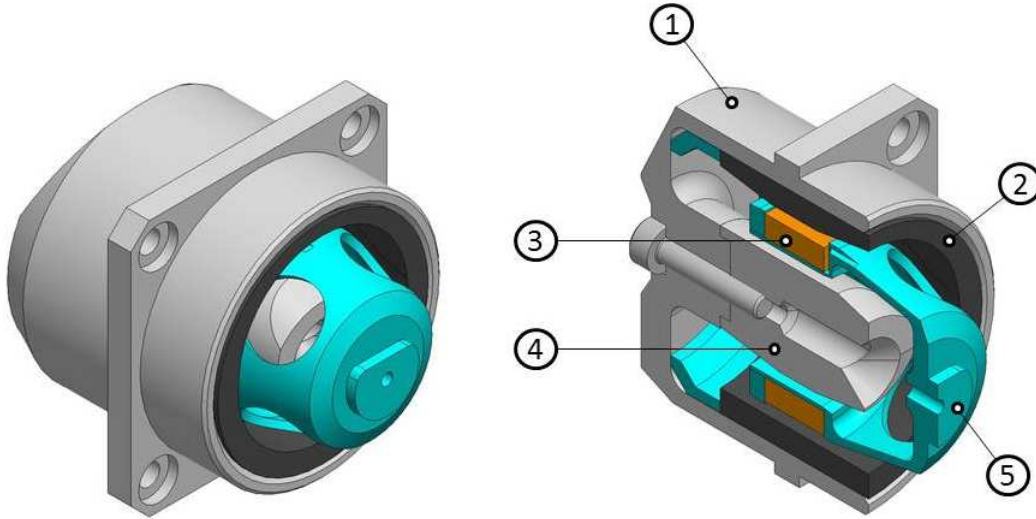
Left: Schematic drawing of the HIFI-FPC actuator. Right: Cross section of HIFI-FPC actuator; 1 = Soft magnetic actuator housing, 2 = Permanent magnet, 3 = Coil, 4 = Soft magnetic core of the actuator housing, 5 = Aluminum coil holder attached to the mirror assembly.
